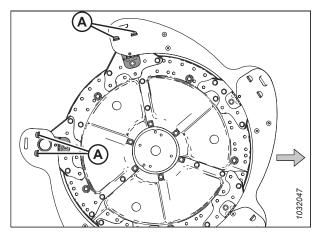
Reel Endshield Removed – Inboard Cam End
